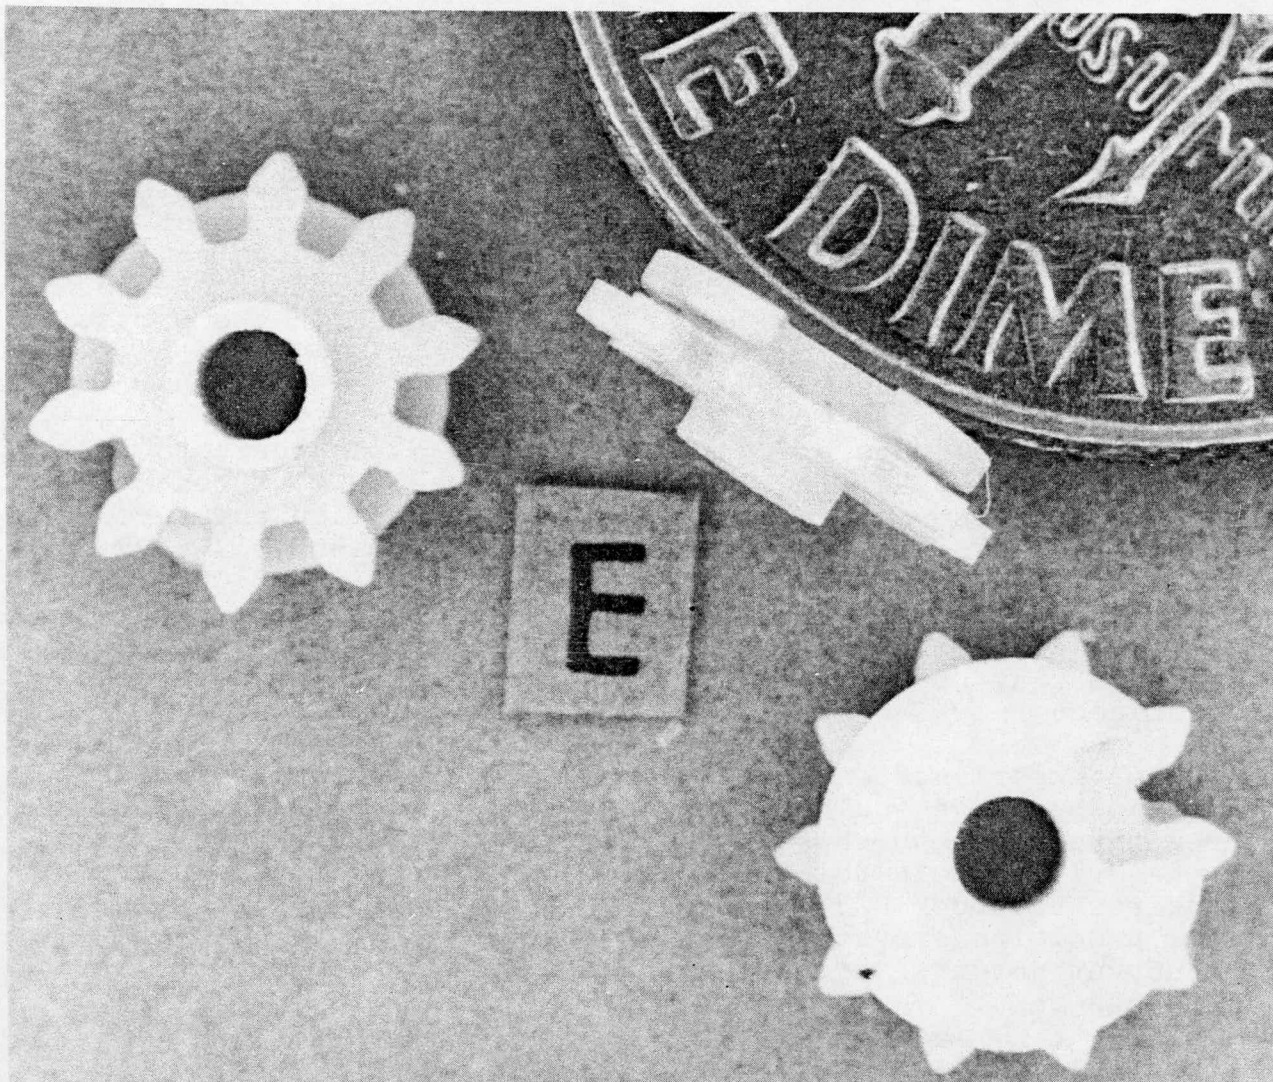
Dimensionally Repeatable Injection Molded Gear and Hub Assembly
